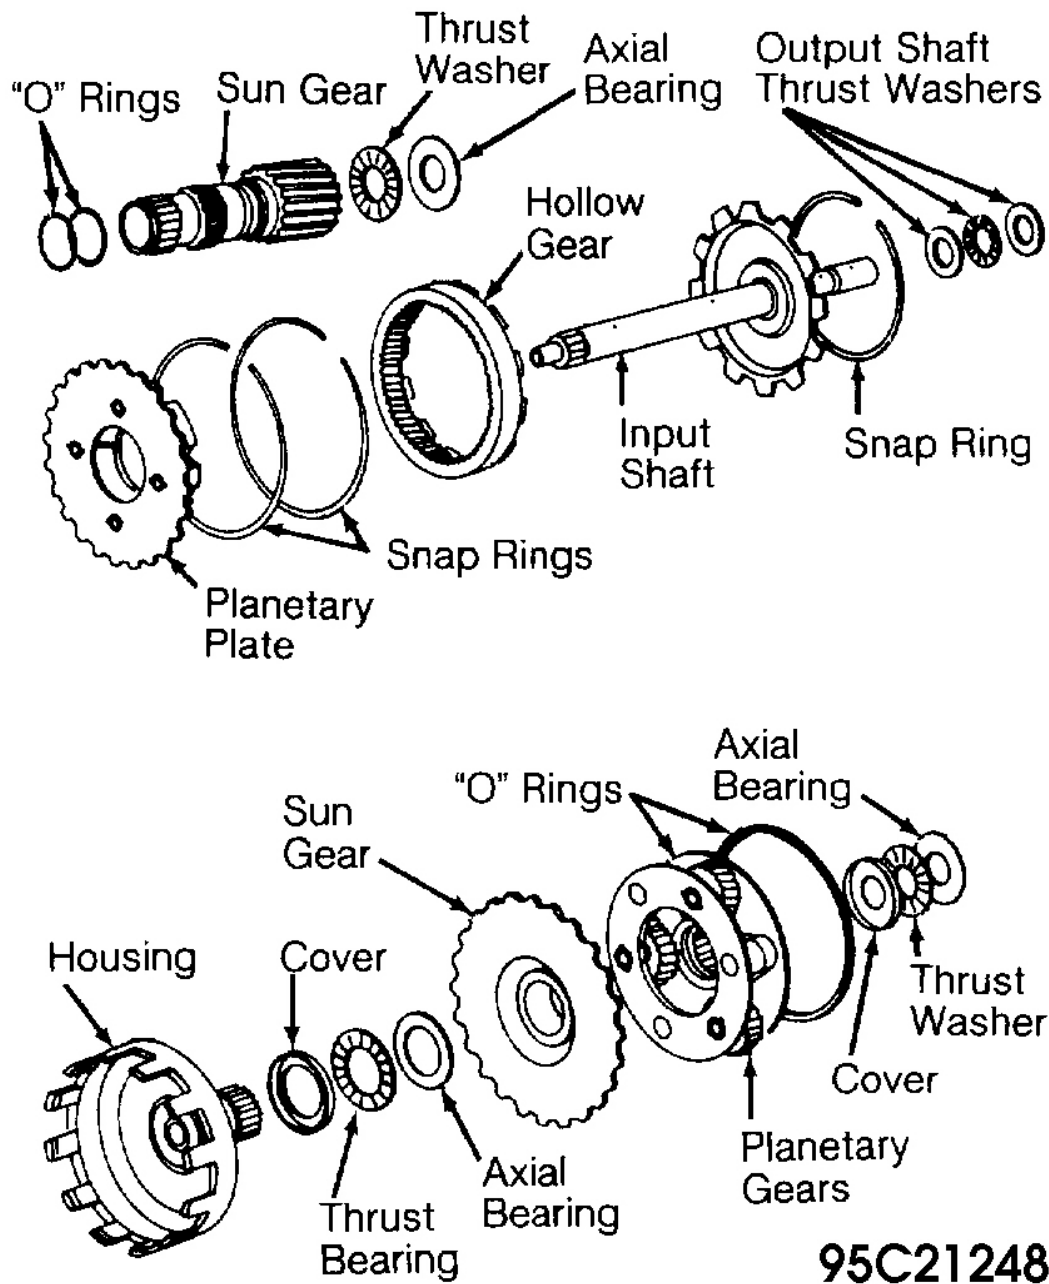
Exploded View Of Front Planetary Gear Set & Components
